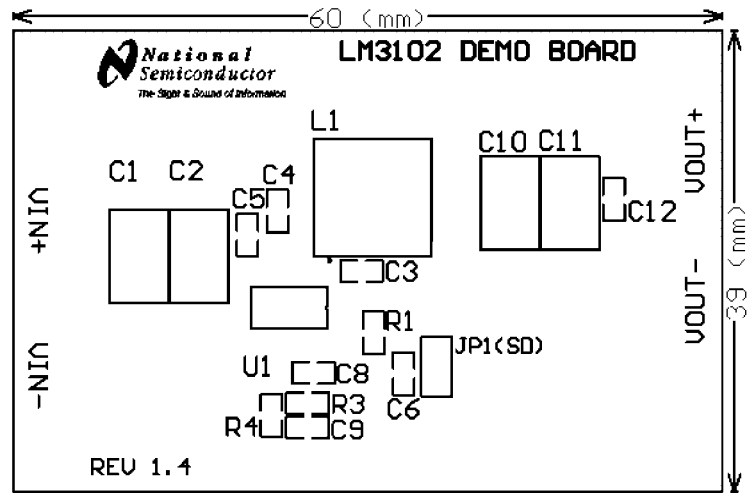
LM3102 Demonstration Board PCB Top Overlay
